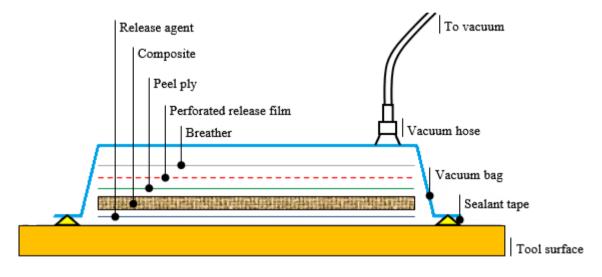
Schematic diagram of vacuum bagging arrangement
